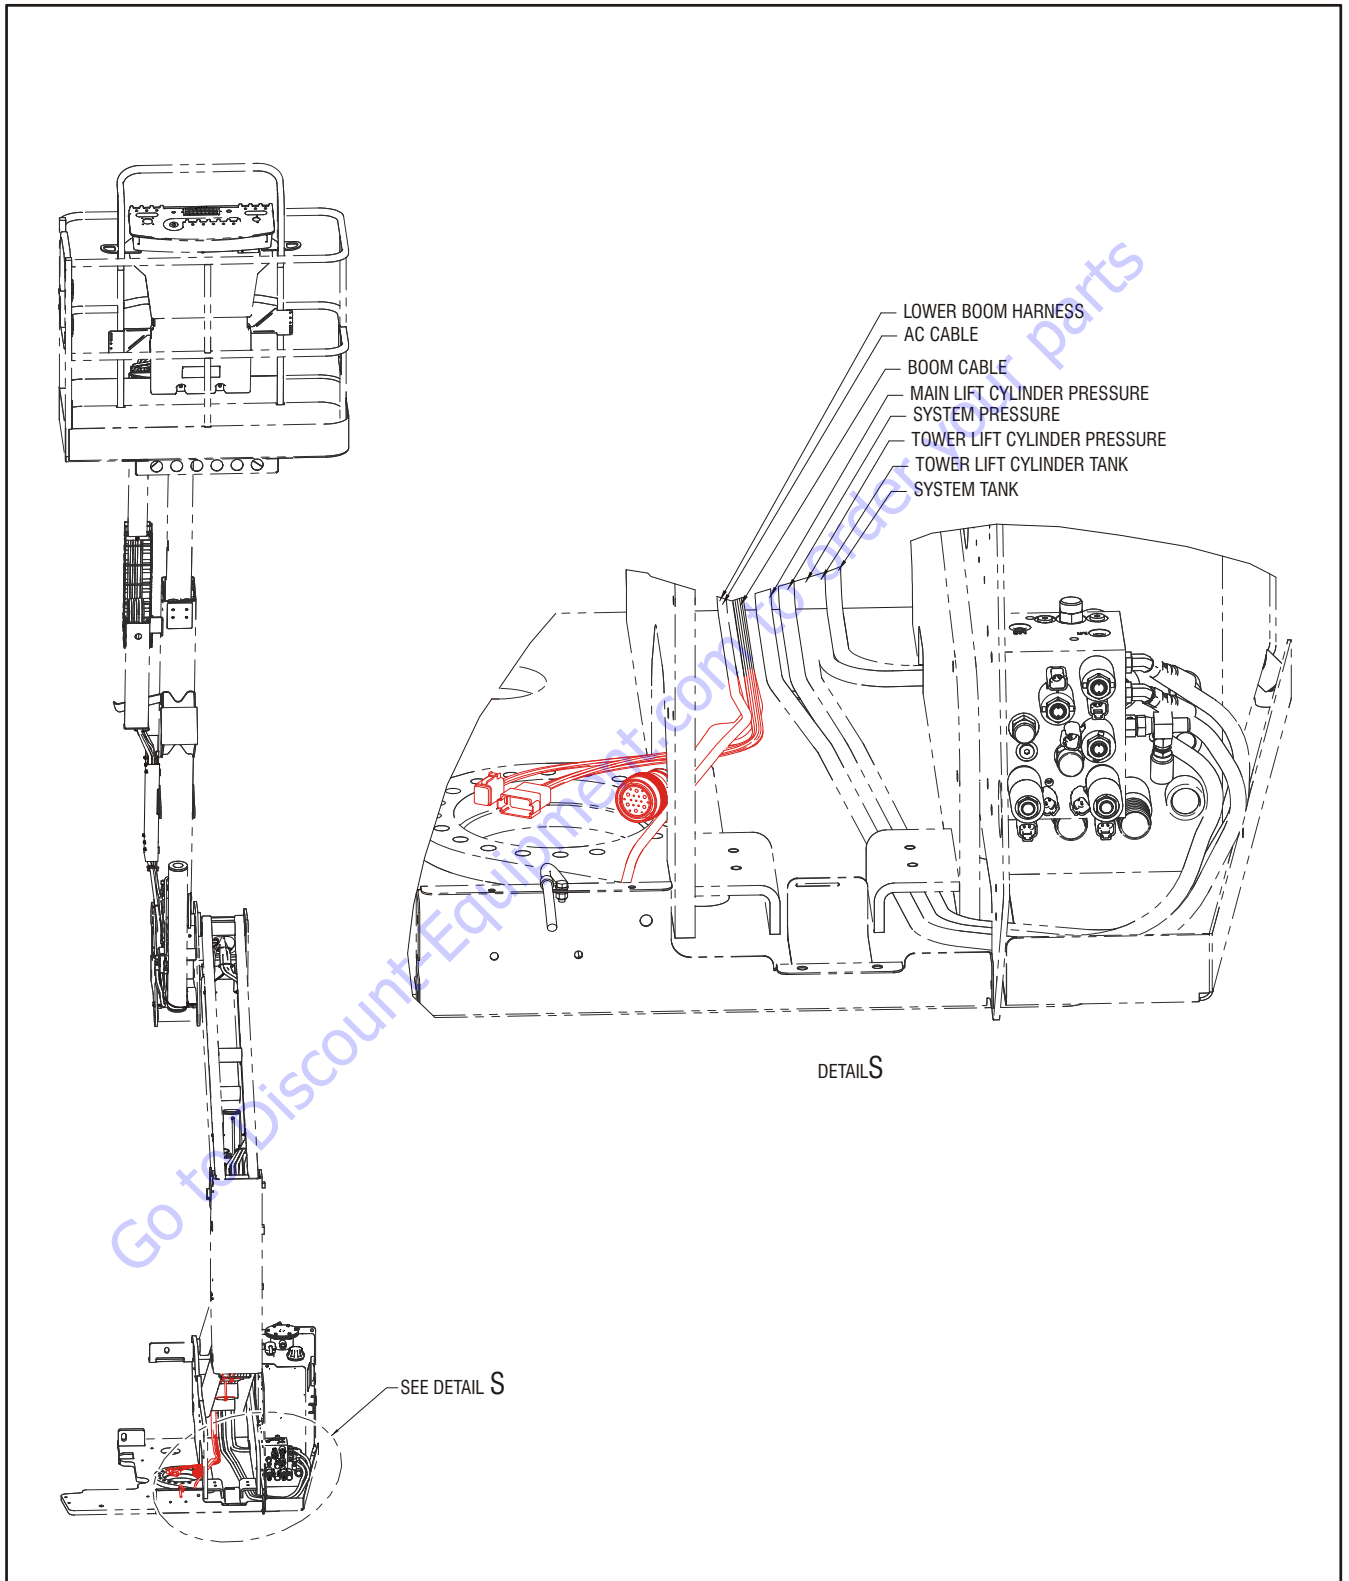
Cable Installation and Identification - Sheet 6 of 8
